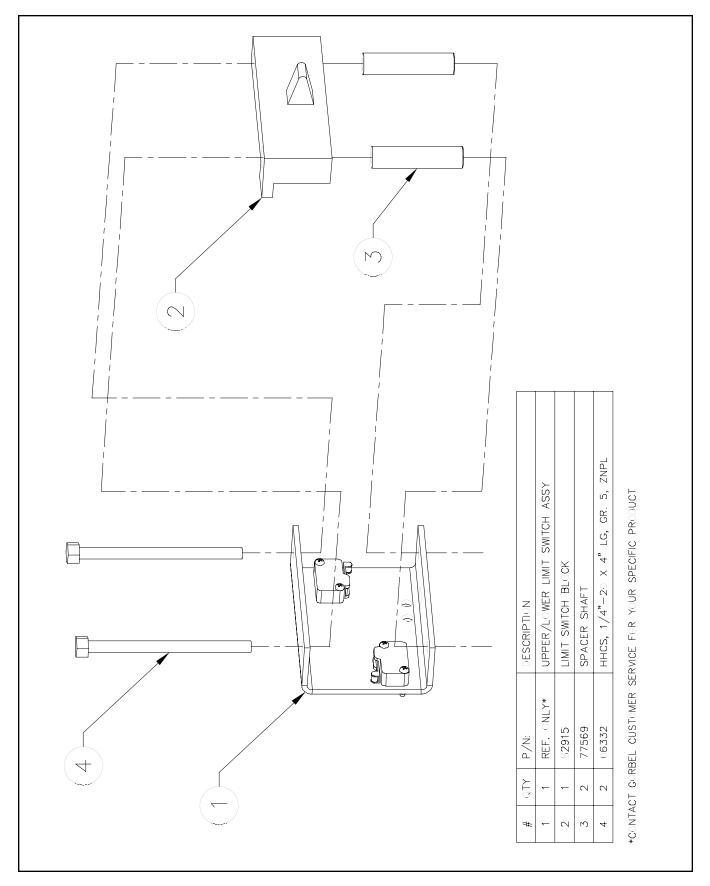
Upper/Lower Limit Switch Follower Assembly.
